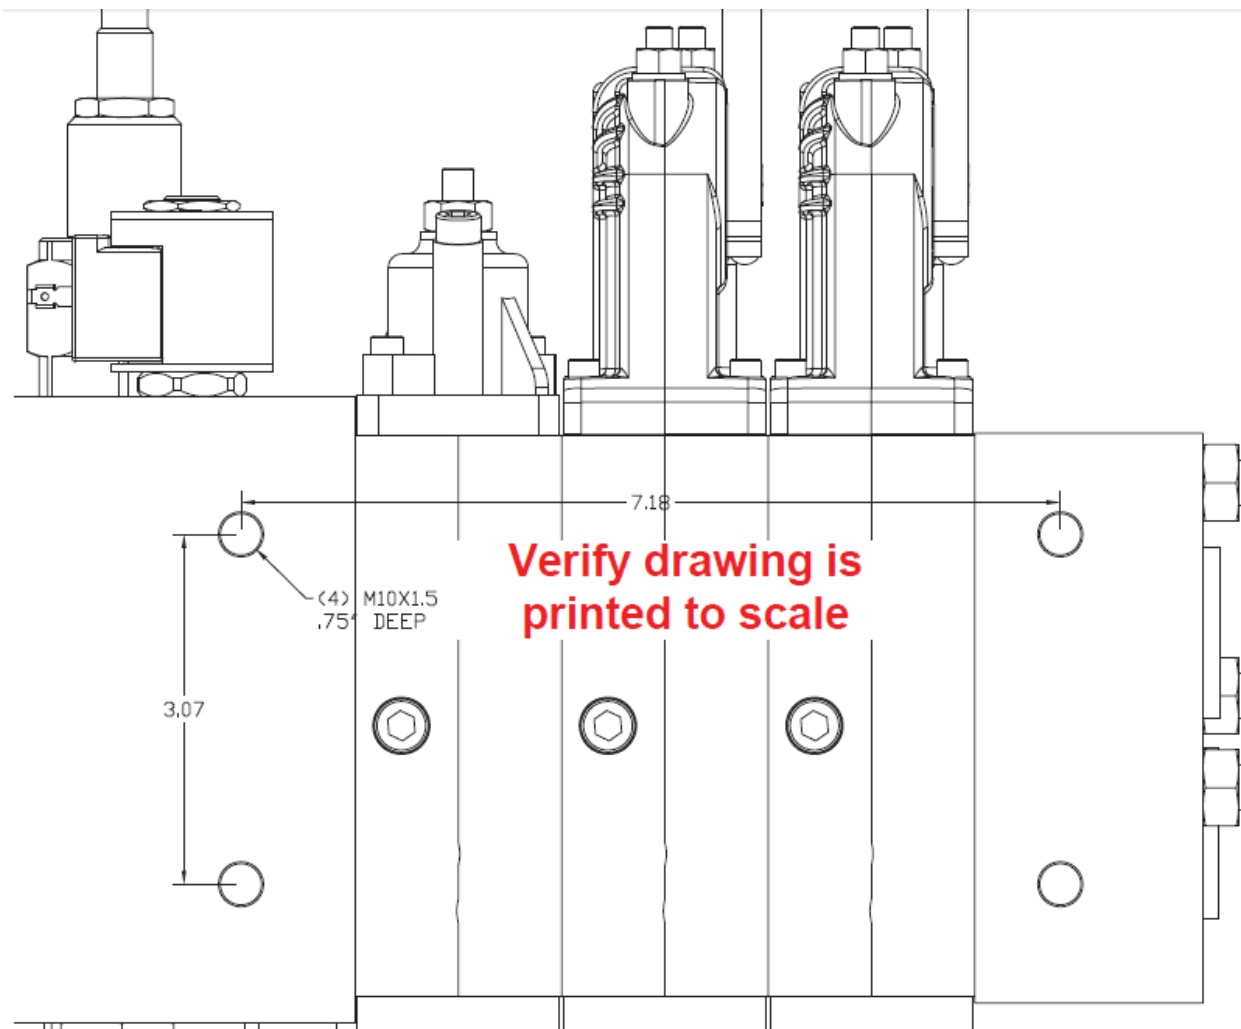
YMD-12866 HYDRAULIC CONTROL VALVE TEMPLATE
